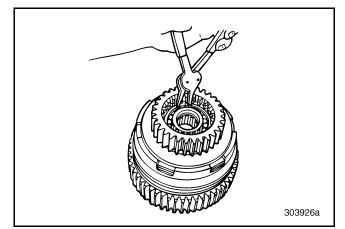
Removing Larger Snap Ring in Gear (T313L/T318L Shown)
